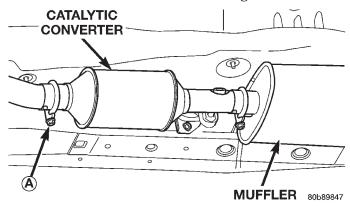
Exhaust Pipe-to-Muffler Clamp
